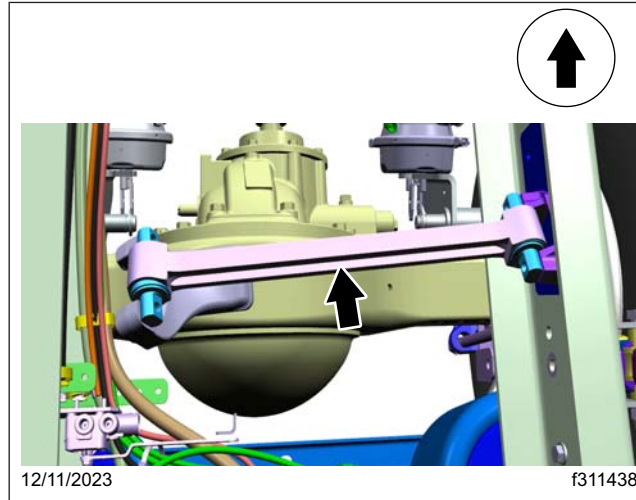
, Rear Axle Placed on the Wheel Dollies
